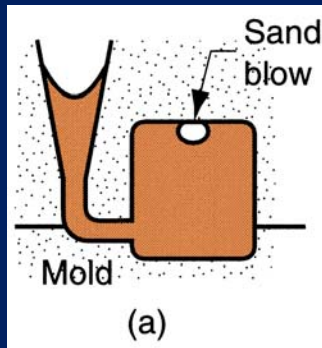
Common defects in sand castings: (a) sand blow
